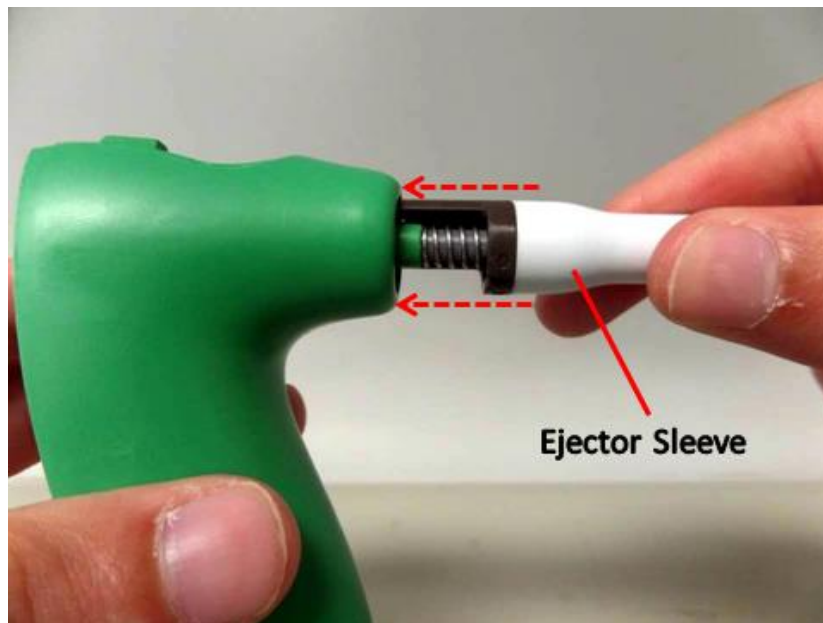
Inserting spring clip tool to restrain ejector spring
